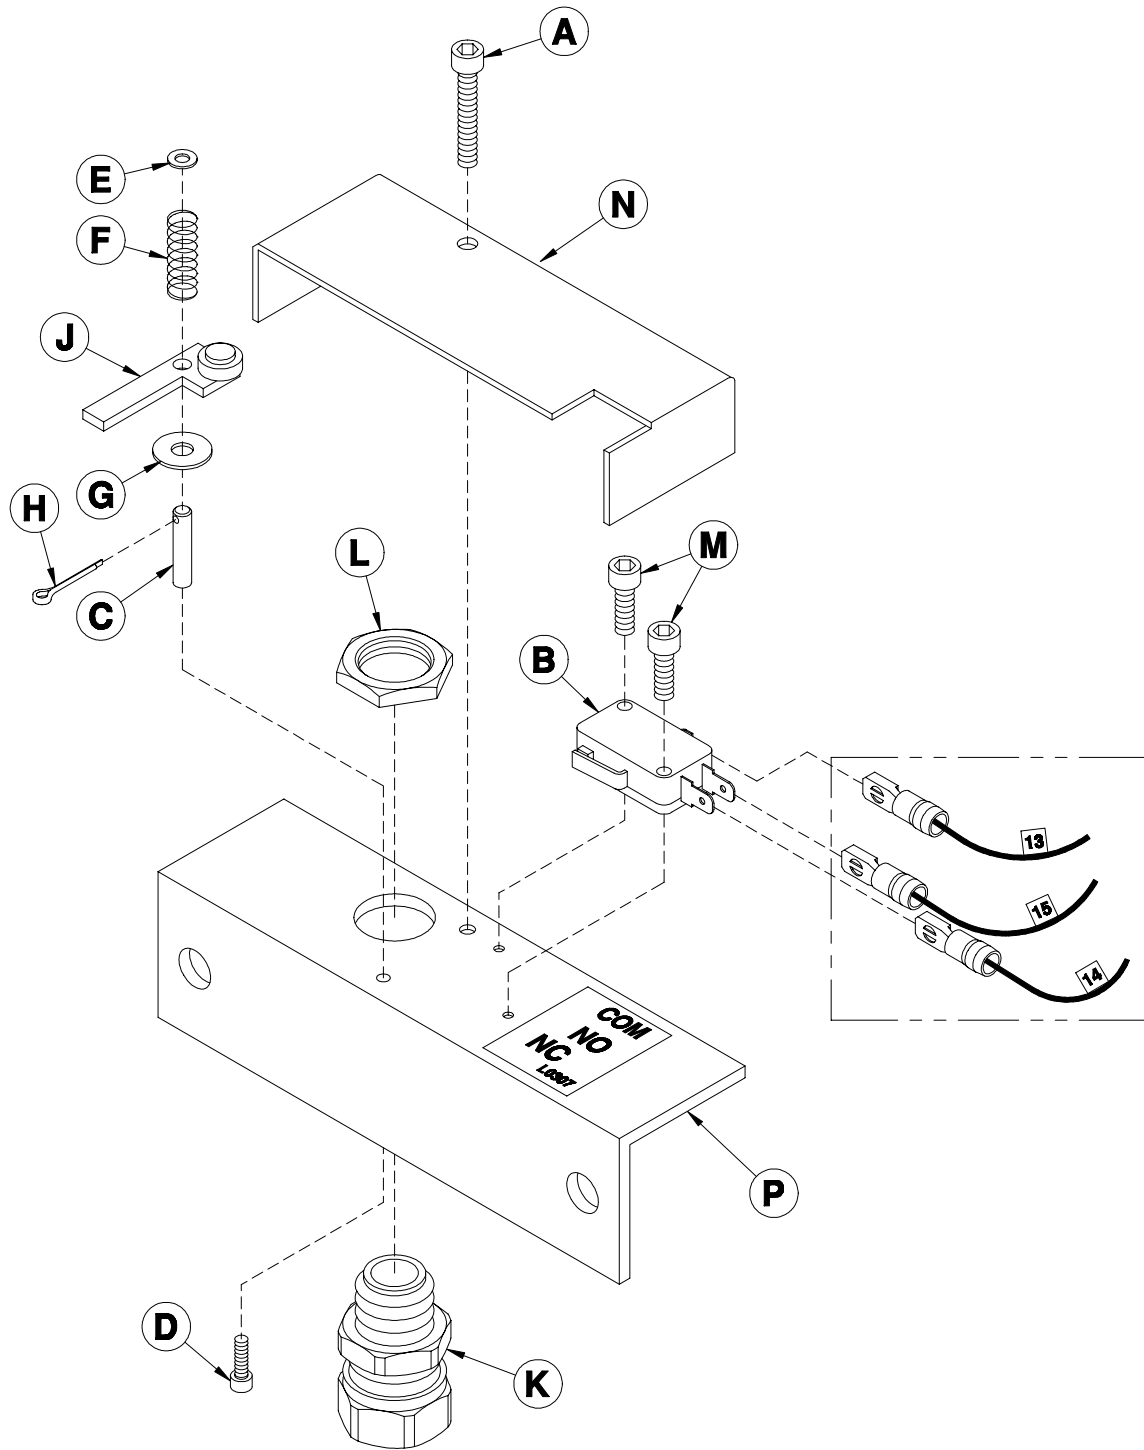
Reversing Switch (Part No. 57745-10), Exploded View
